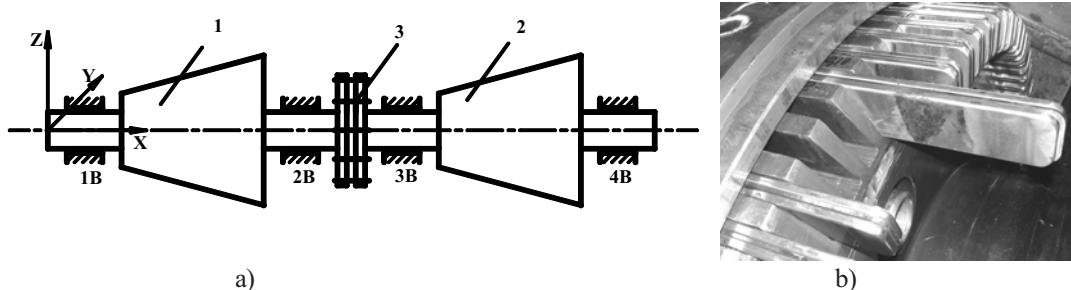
Rotors and bearings layout: a – rotating system, 1 – HPR, 2 – MLPR, 3 – TWC, 1B and 3B – radial-axial bearings, 2B and 4B radial bearing; b - view of TWC with plate packets
